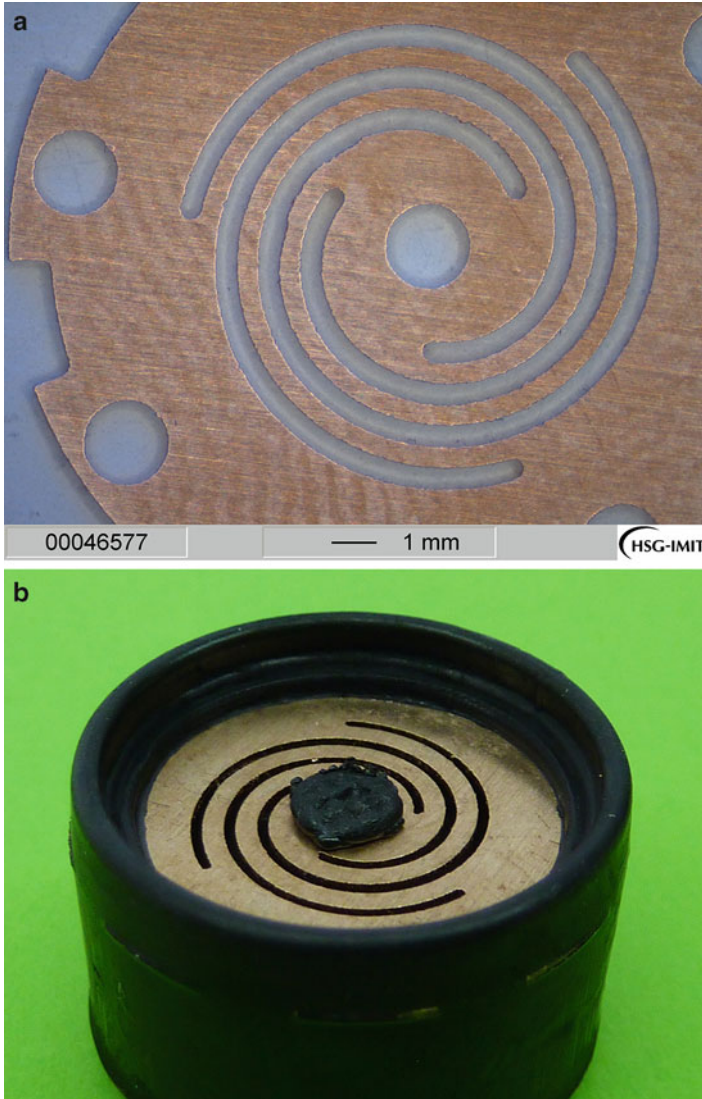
CuSn6 spring element (a) before and (b) after the mould process. In the middle the rivet head of the magnet support is visible. The spring element in (a) is for 2nd order conversion (smaller beam width) and in (b) for 4th order conversion prototype
